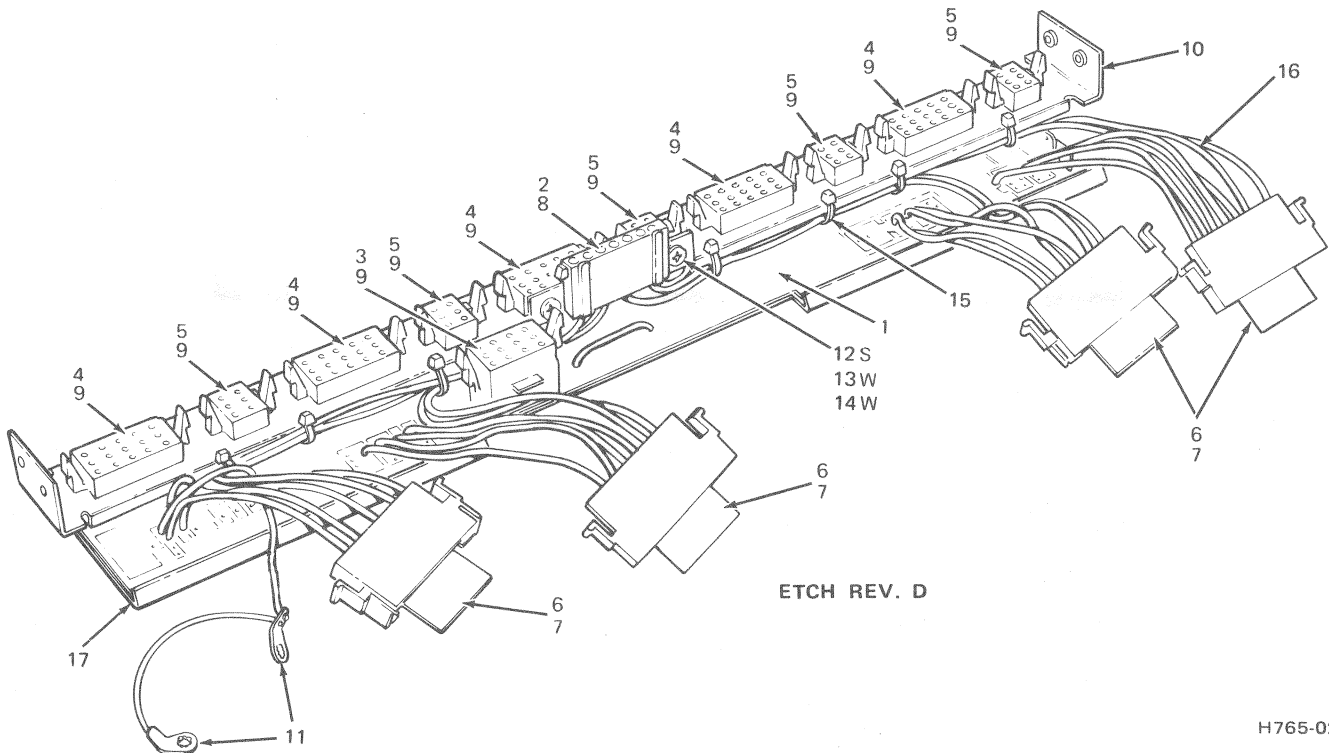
Power Distribution Board Assembly (Etch Rev. D)
